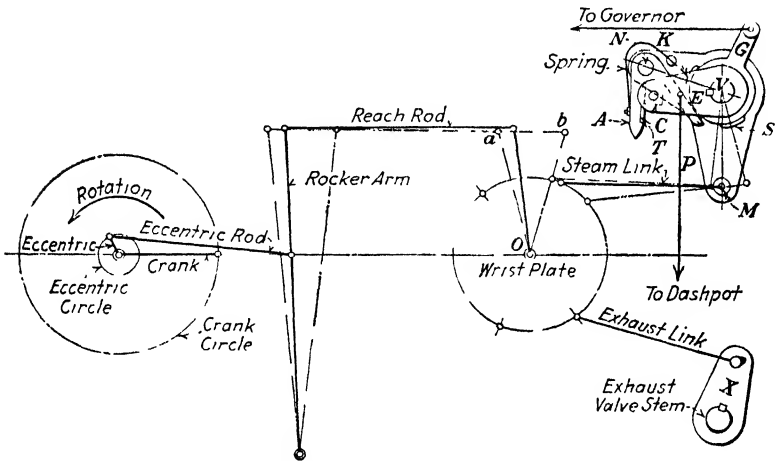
Diagram of releasing type of Corliss valve mechanism.
